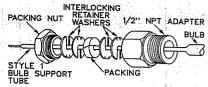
Part No. FTG13A-600R packing nut assembly. (Used with swaged bulb with support tube for direct immersion application.)
